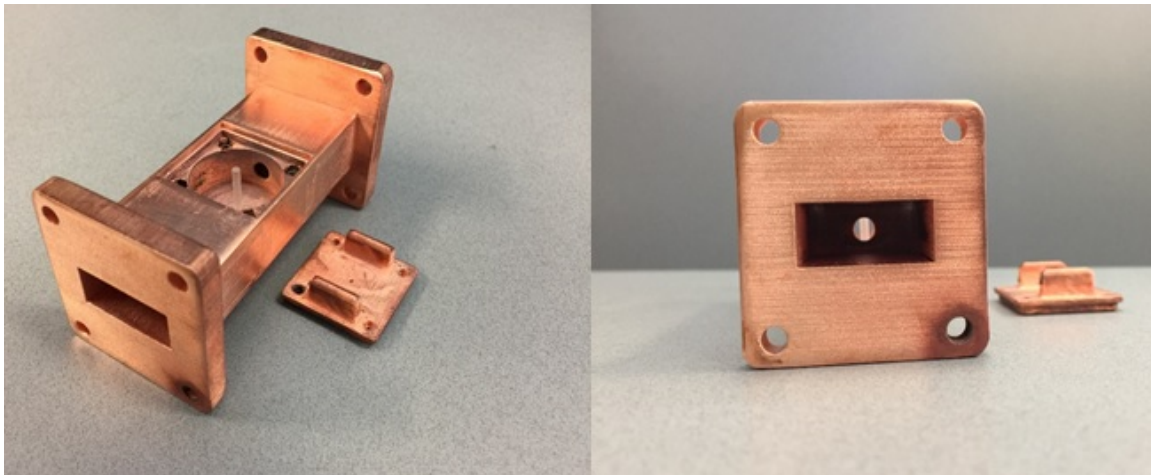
Copper deposited 3-D printed prototype of cylindrical cavity with removable top.
